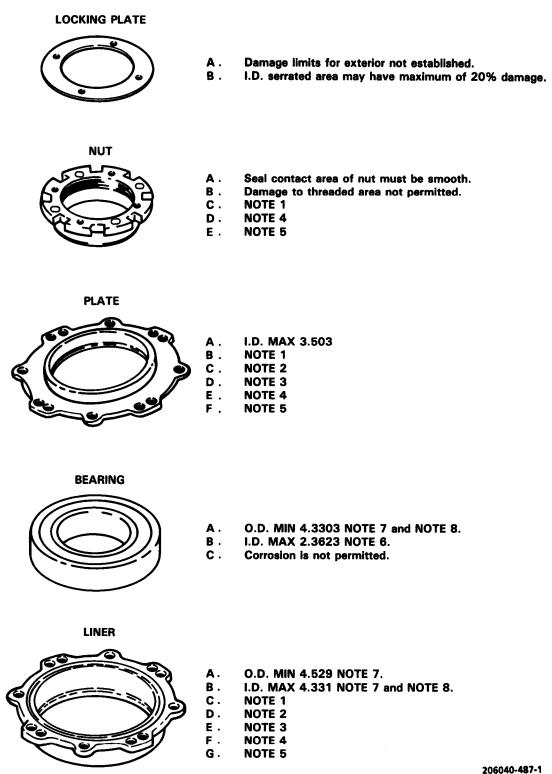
Main Rotor Mast Subassemblies (Sheet 1 of 2)
